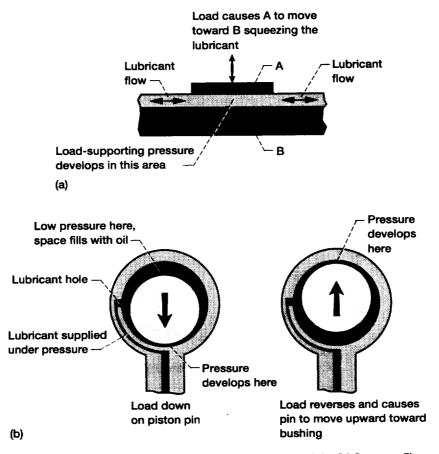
Squeeze film bearing. (a) Squeeze film principle. (b) Squeeze film in piston pin bushing.
